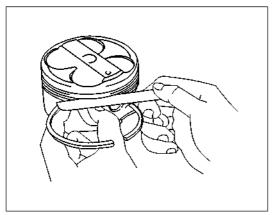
6 - 37 Check the Clearance of Piston Ring Groove
